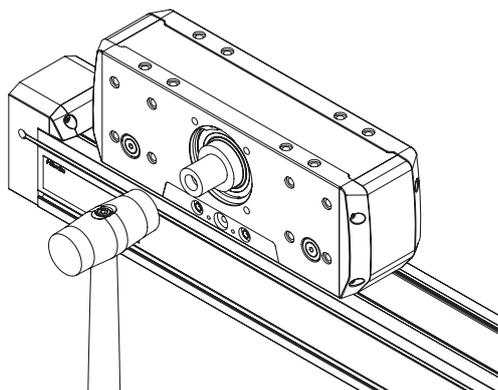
Inserting the journal in the cantilever axis HC-B drive block
